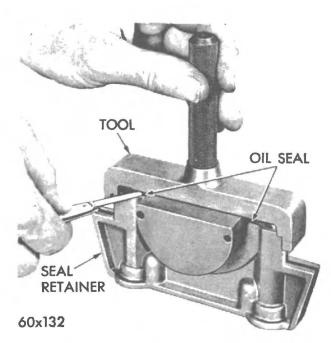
Trimming rear main bearing oil seal (Tool CA-3743).
